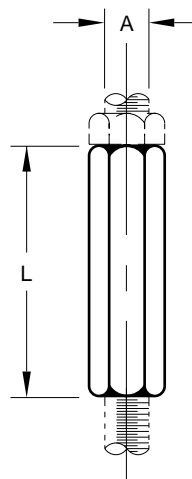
R is used to reduce rod sizes. Coupling are made of carbon steel to step up or down one rod size.
